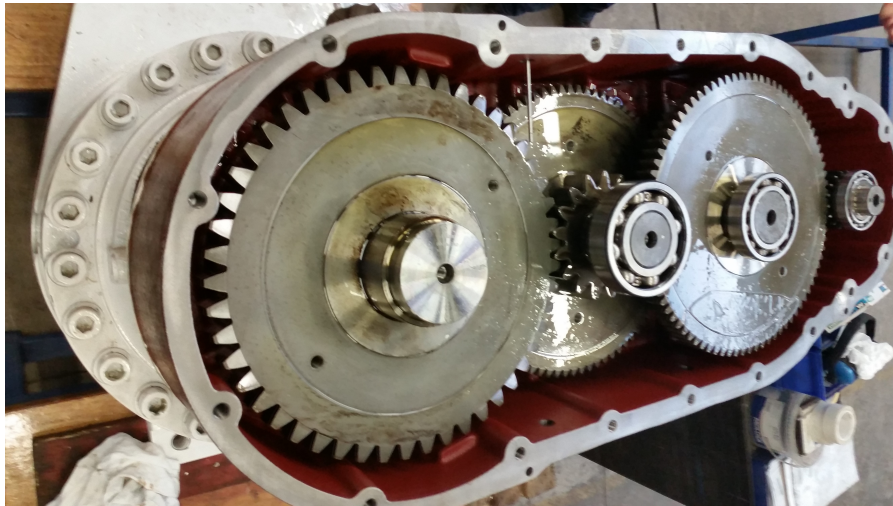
Jacking system gearbox without sensorized bearing installed
